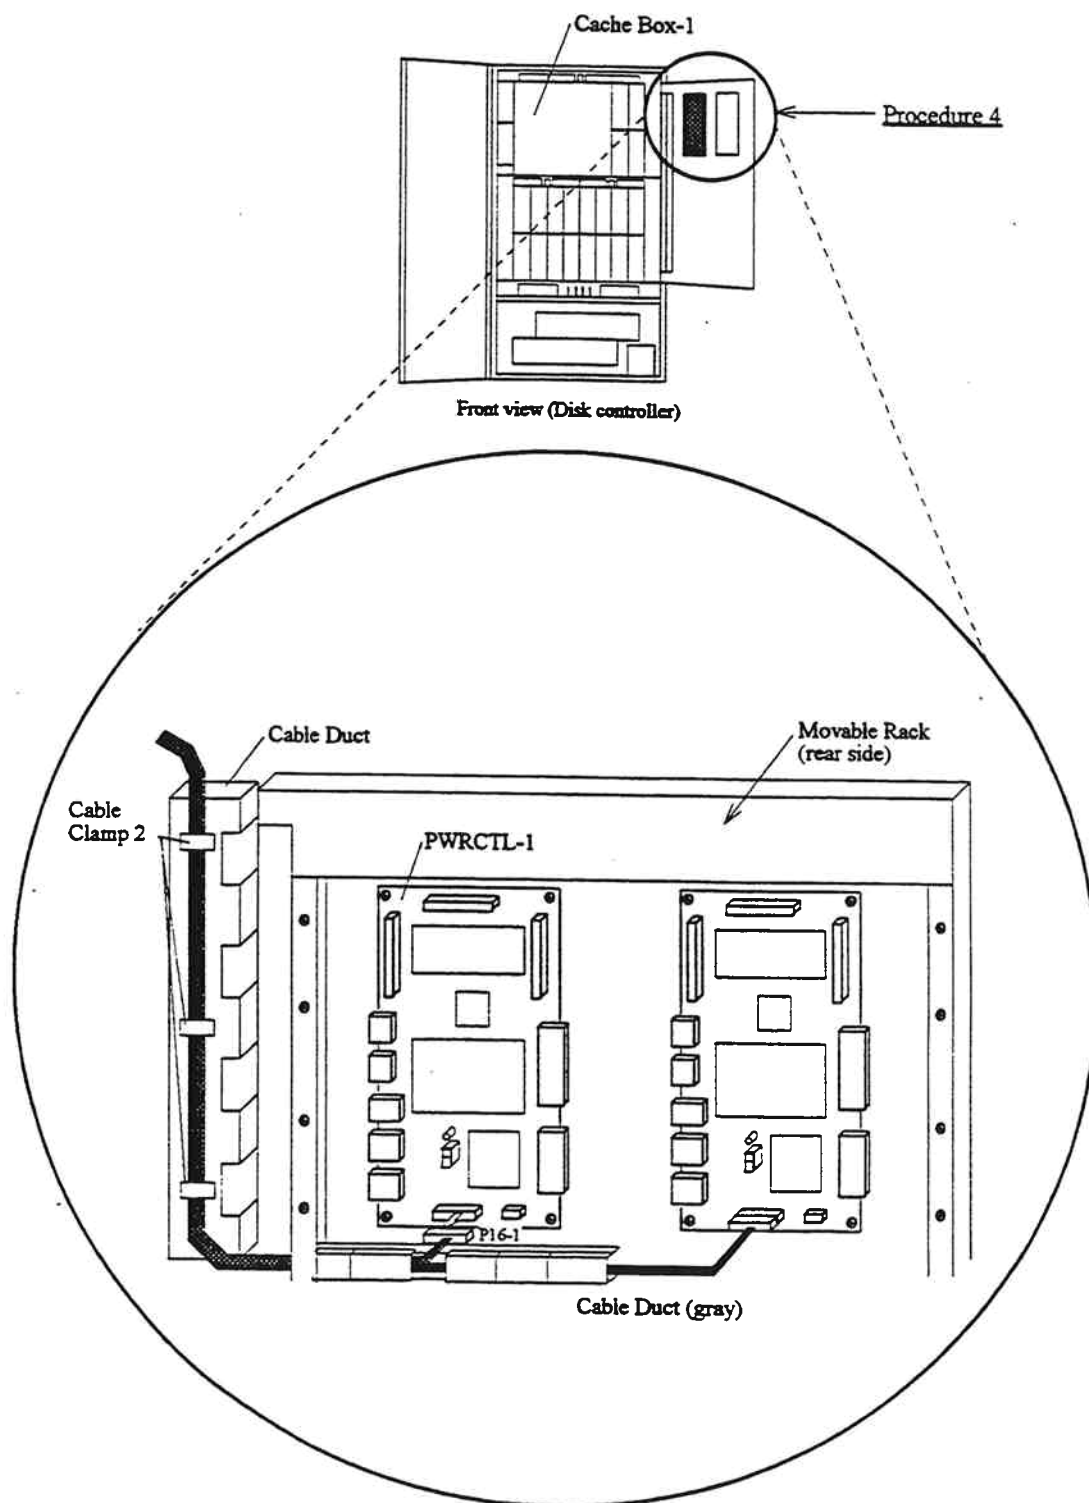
Disconnection of the Cables
